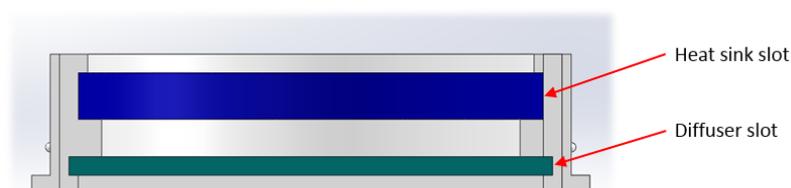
Holders design with heat sink and diffuser (optical elements) contact points.
